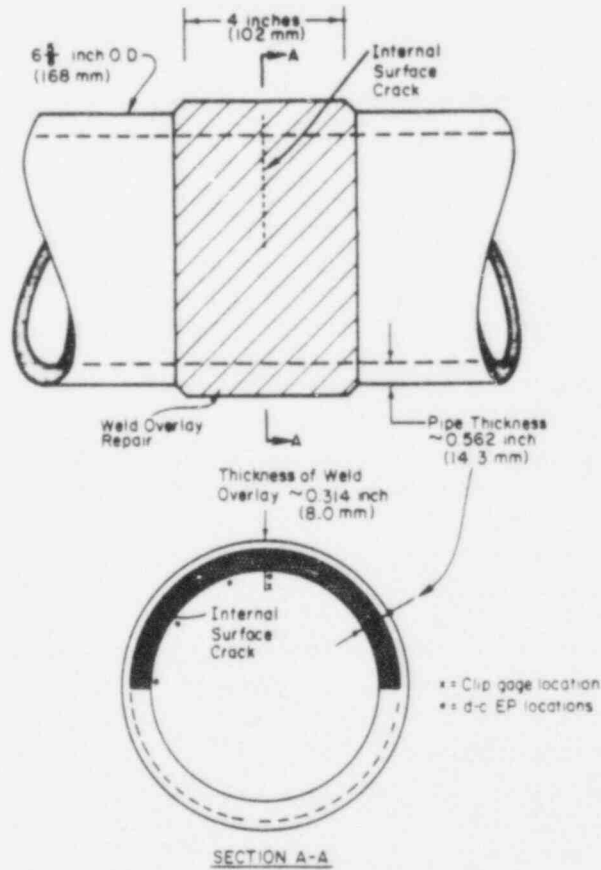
Schematic of crack geometry in weld overlay pipe fracture experiments.
